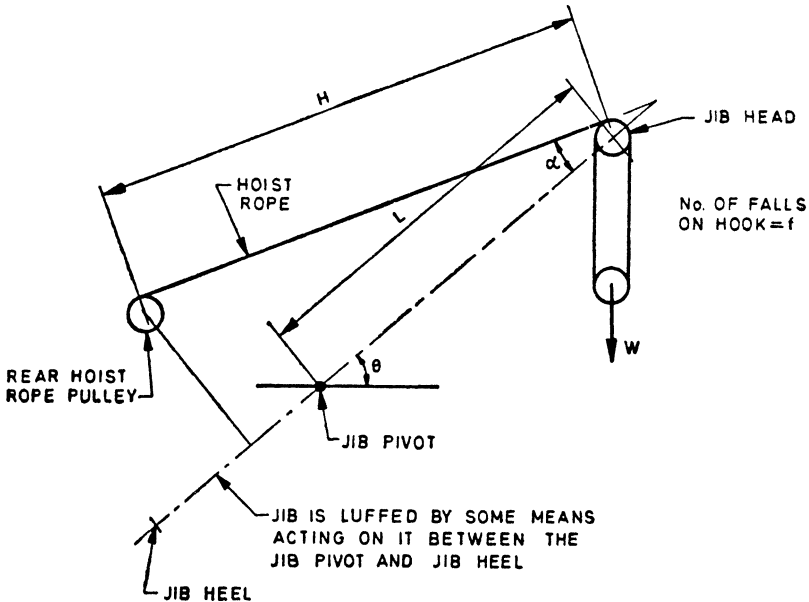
CANTILEVER CRANE JIB WITH HOIST ROPE NOT PARALLEL TO JIB AXIS
